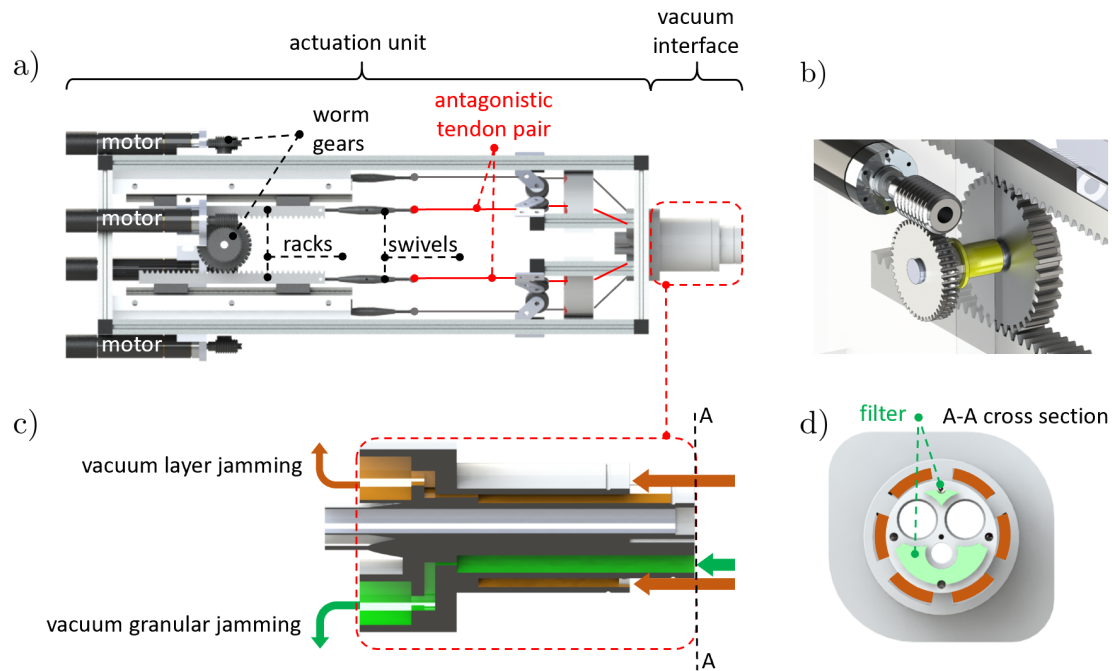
Actuation unit for Prototype 3: a) Overall actuation unit; b) DC motor rotation transmission to the gear racks; c) Vacuum interface cross-sectional view showing separated air pathways for granular and layer jamming; d) Separated vacuum inlets for granular and layer jamming in a cross-sectional view.
